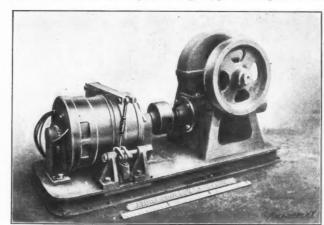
Application of One-speed Spinner Motor to Haulage Gear
